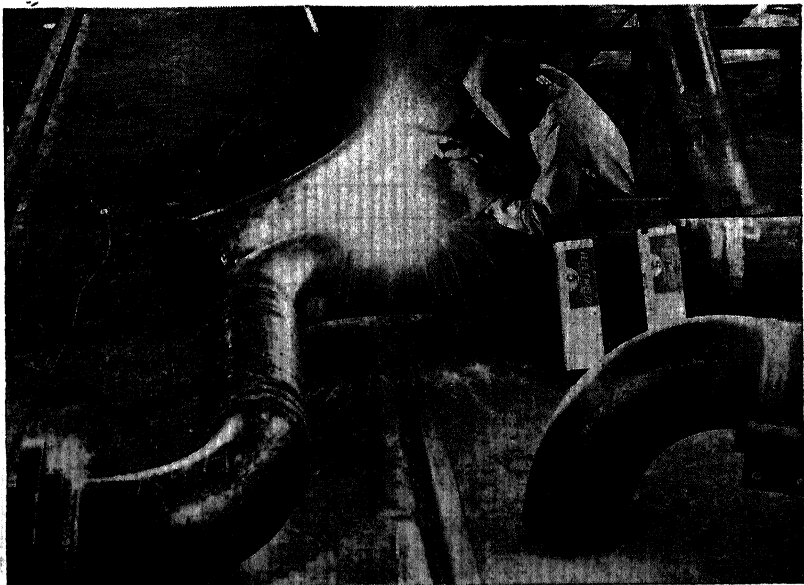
Fabricating complicated turns for a water supply system by manual shielded arc welding in a large mid-western pipe company.
